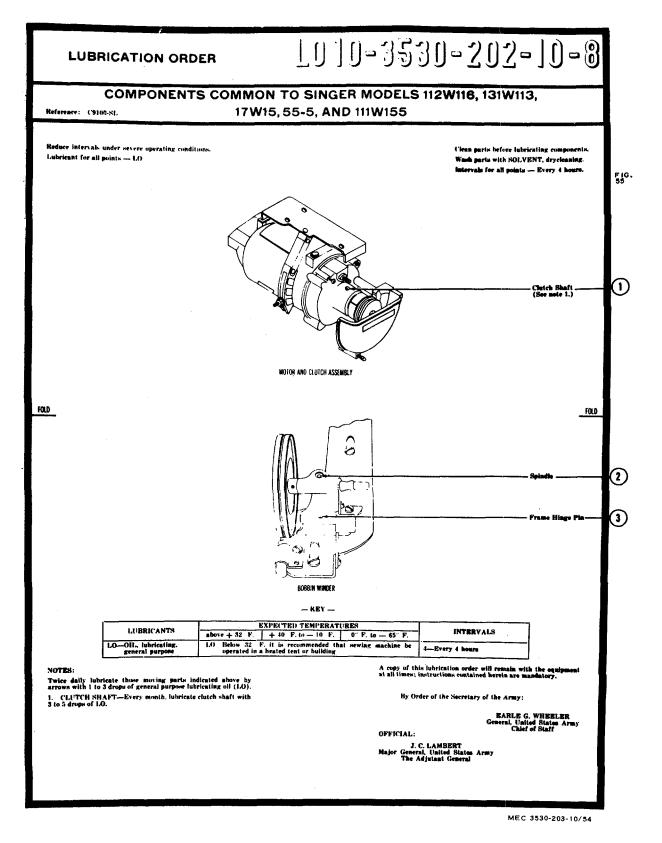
Lubrication Order 10--3530-202-10-8 for components common to textile sewing machine.
